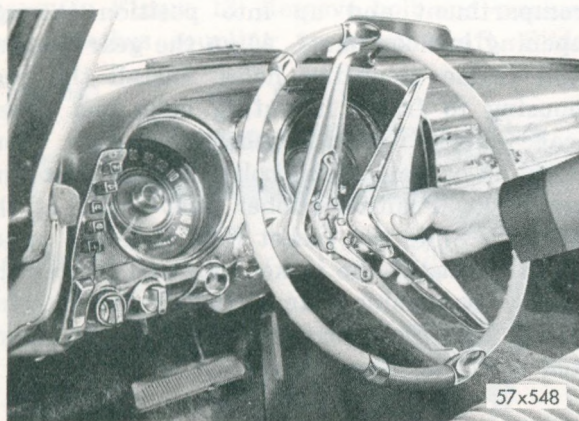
Removing or Installing Steering Wheel Horn Ring
